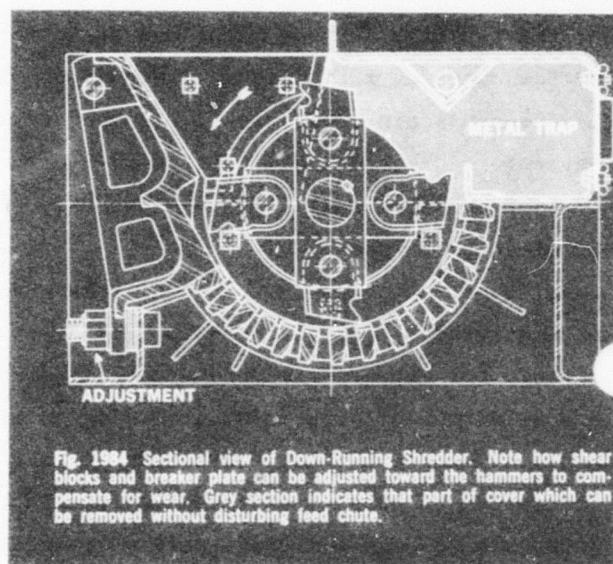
SECTIONAL VIEW OF HAMMERMILL SHREDDER/GRINDER (2)
